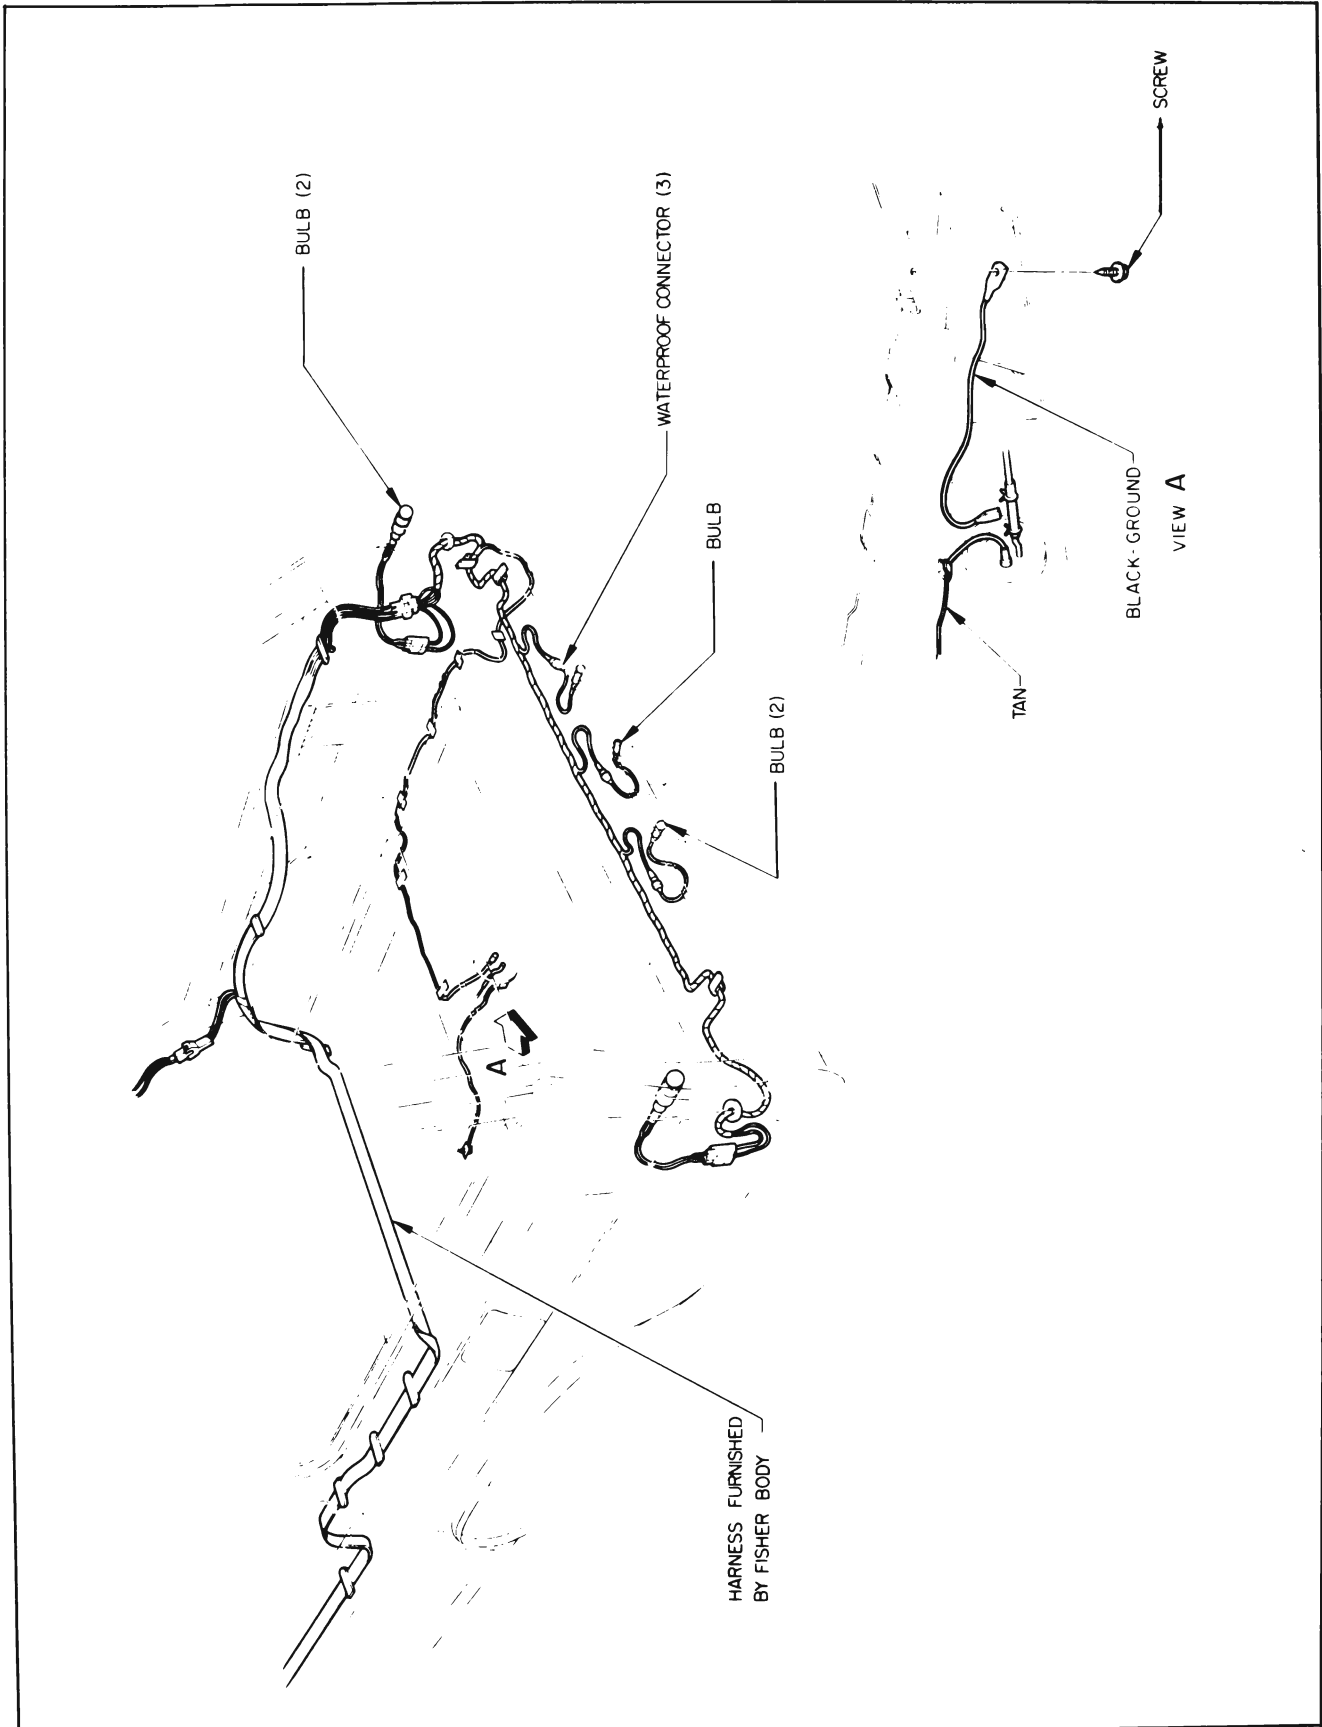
Rear Lamps and Fuel Gauge Tank Unit Wiring - Wagons
